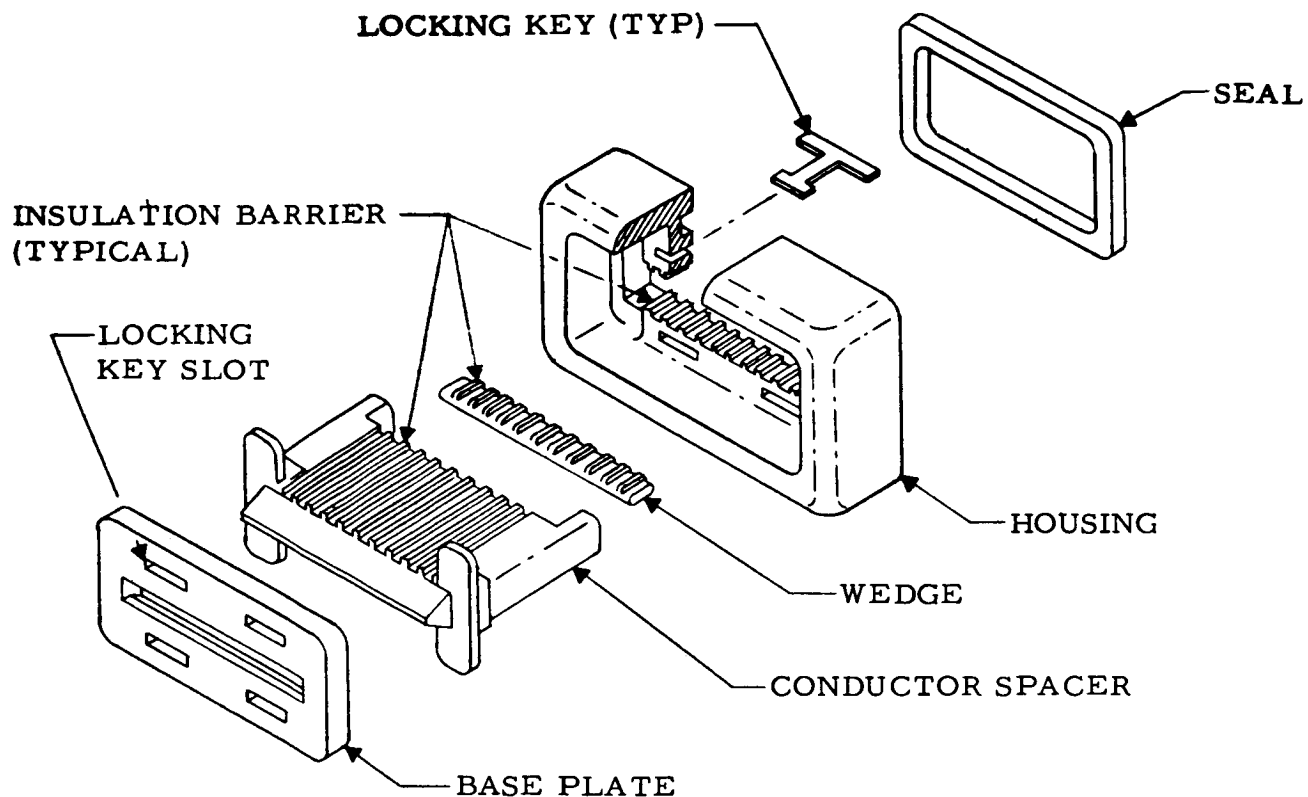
TYPICAL PREMOLDED RECTANGULAR PLUG PARTS
